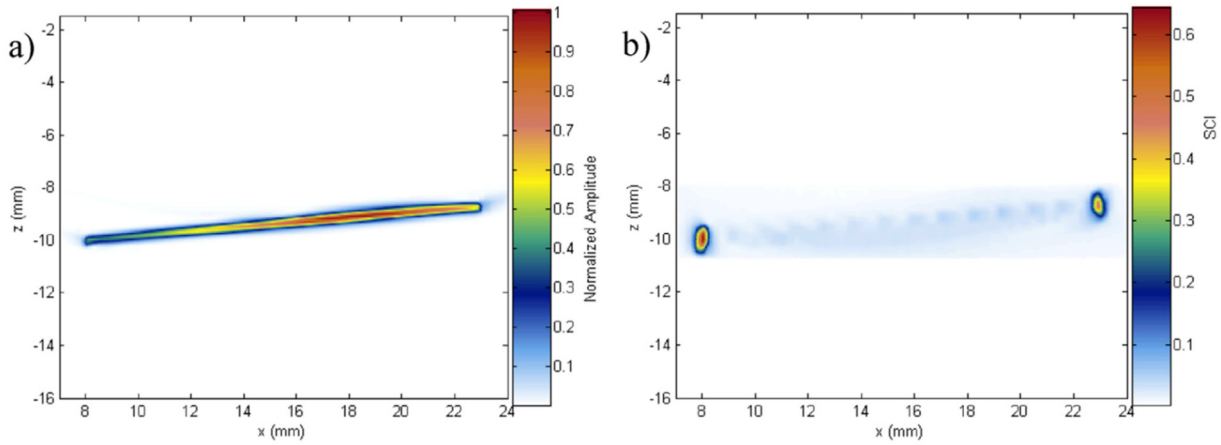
Ultrasound images of a plain fatigue crack using a) TFM and b) PCI [145].
